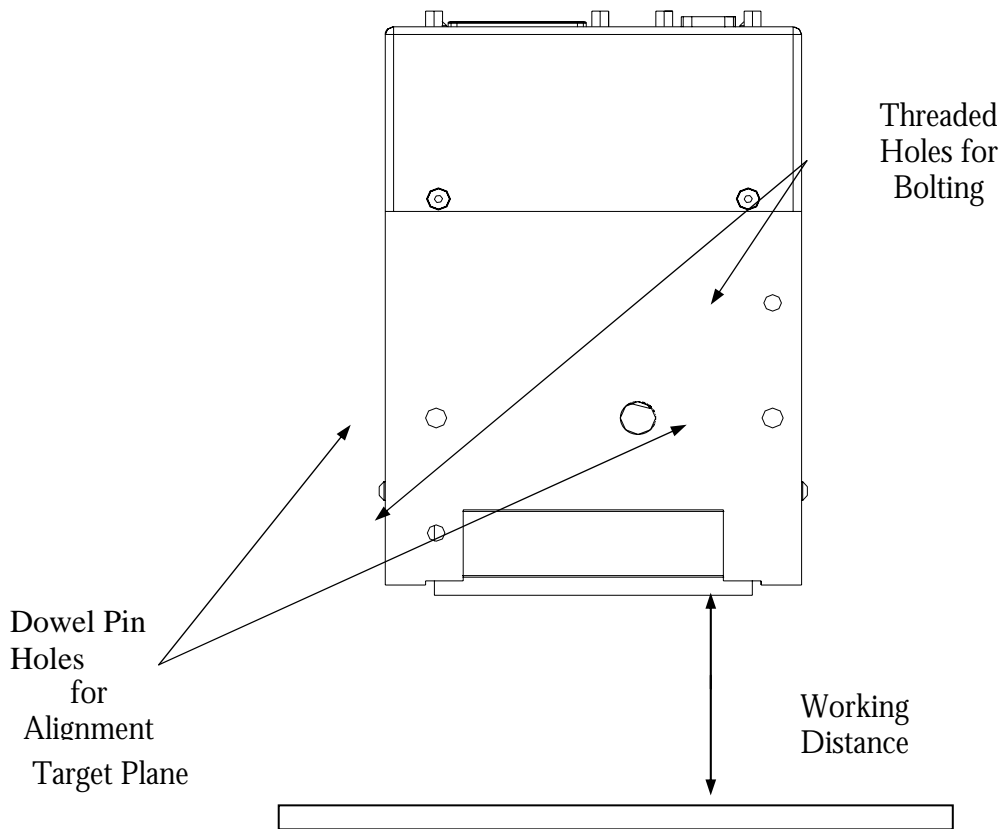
The mounting holes are located on the Beam Input side of the HB™ assembly. General locations of the two types of mounting holes are described. For exact dimensions see [APPENDIX B: Outline Drawings](#).
